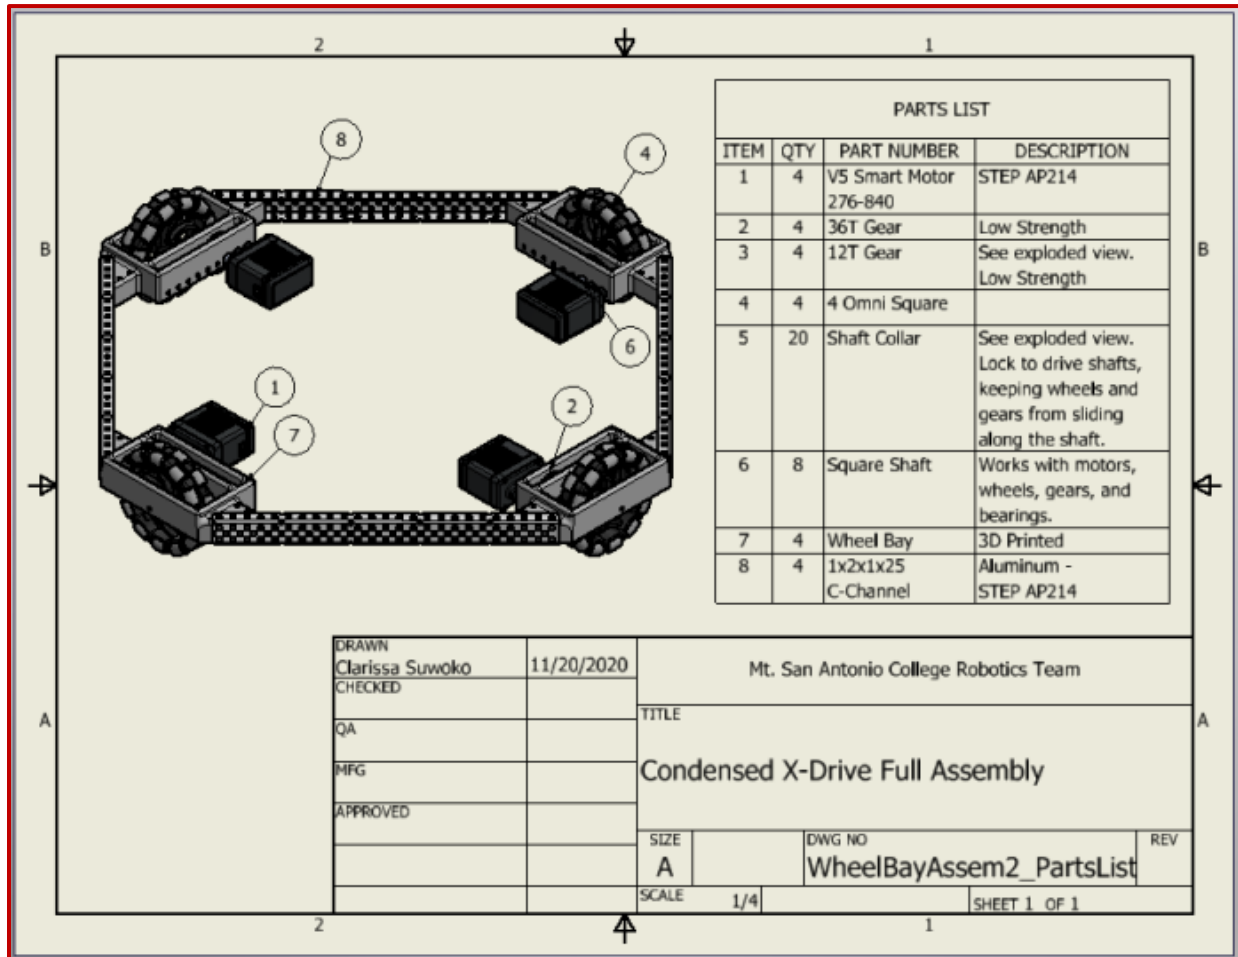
The figure above is a drawing file illustration which displays the top-down view of the wheel bay being utilized in a standard x-drive drivetrain.
